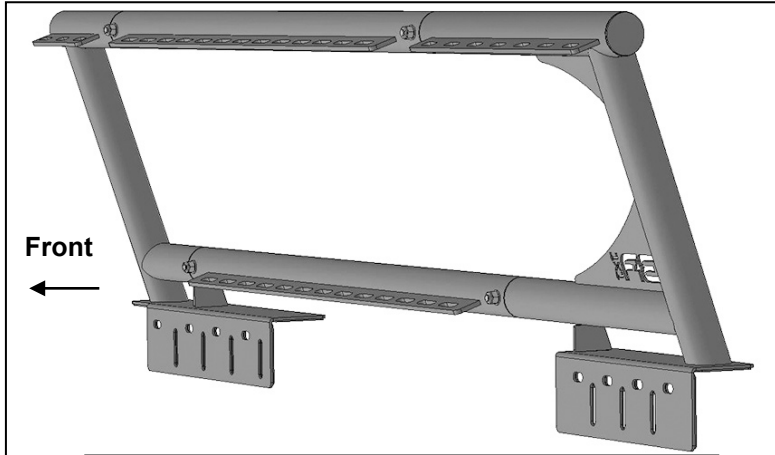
Attach Side Tubes to passenger/right front Rack End. IMPORTANT: Install Side Tubes with mounting track toward inside of Rack assembly and angled downward
